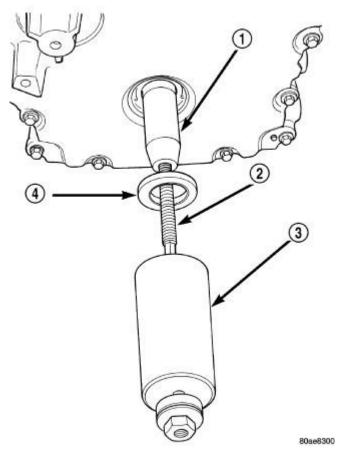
Crankshaft Front Oil Seal - Installation Courtesy of CHRYSLER LLC
